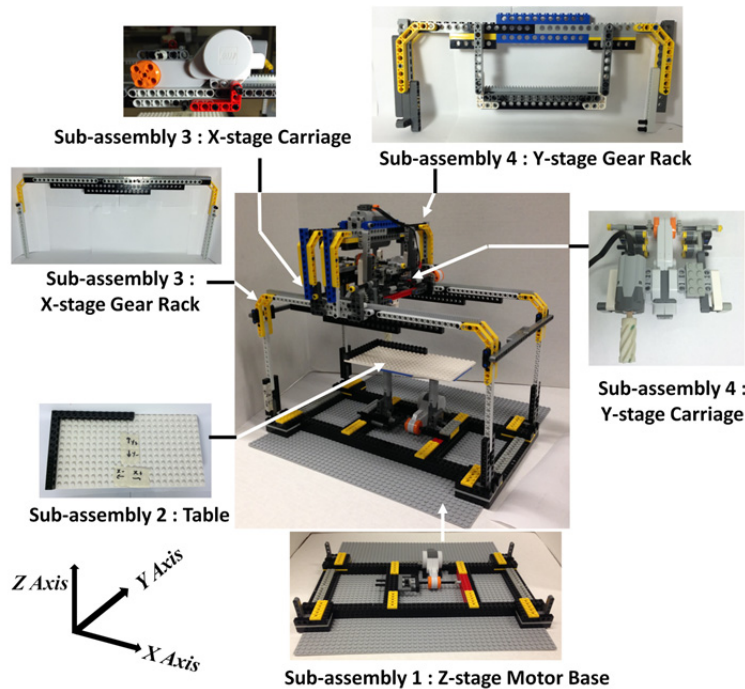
Exploded View of Lego™-based machine tool (LMT) for subtractive manufacturing
